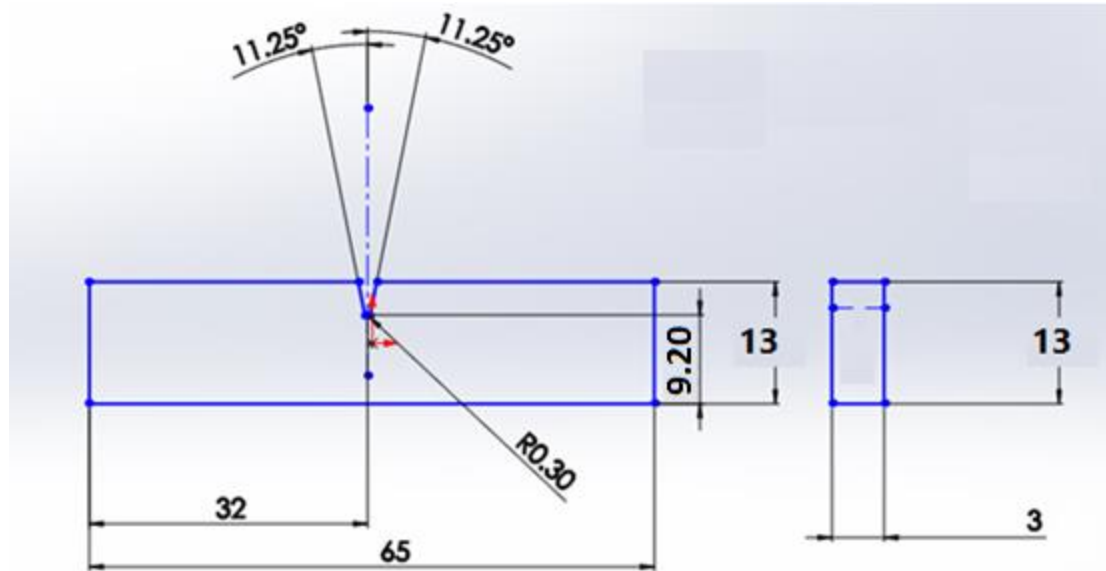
dimensions of impact test specimen (all dimensions are in mm)
